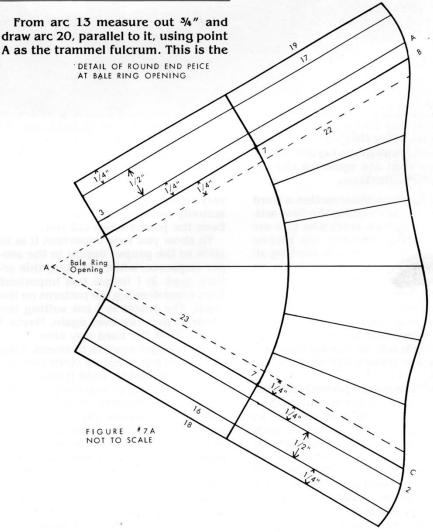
A is just an enlarged view of Fig. 7 at the bale ring opening (part A) Fig. 7B is an enlarged view of Fig. 7 at corner "B". Corner "C" will be the same as corner "B" only reversed.
